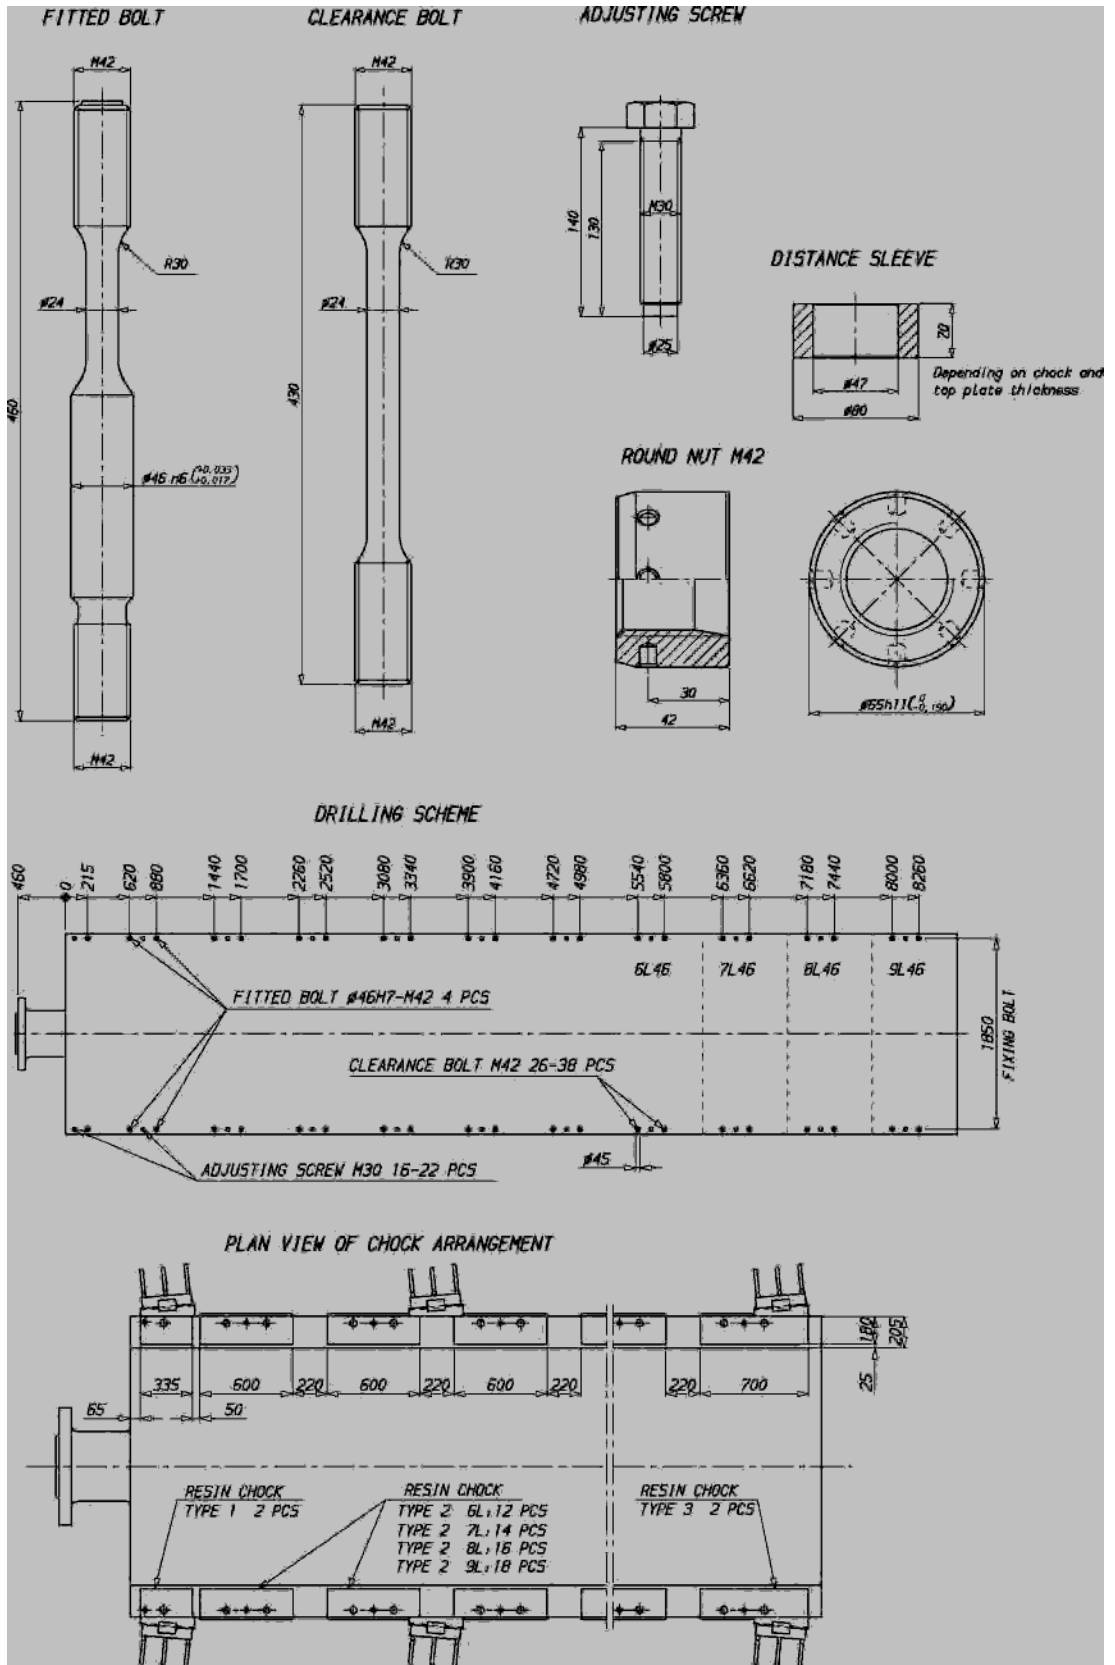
Seating and fastening, rigidly mounted in-line engine on resin chocks (DAE012078a)
